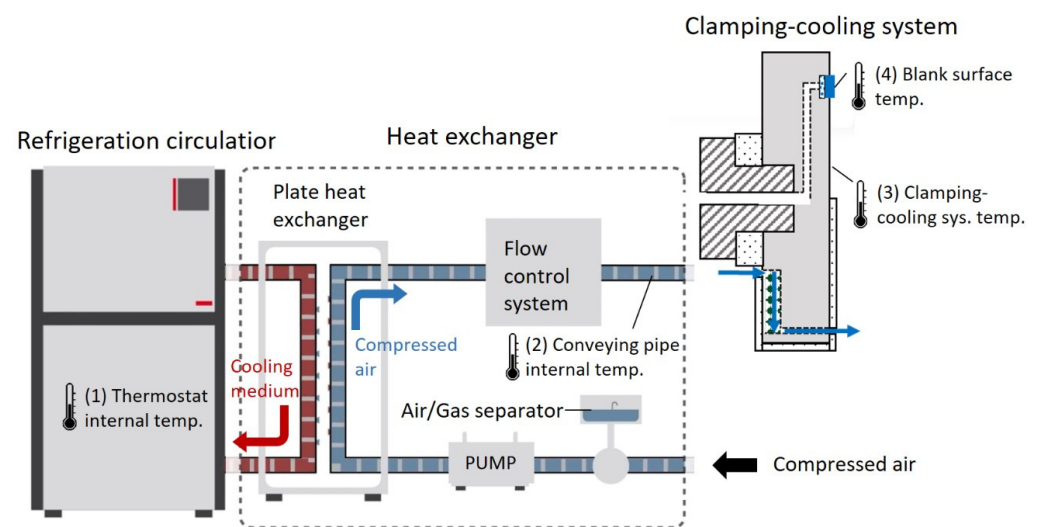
Principal layout of the supply system for compressed cold air and clamping–cooling system.
